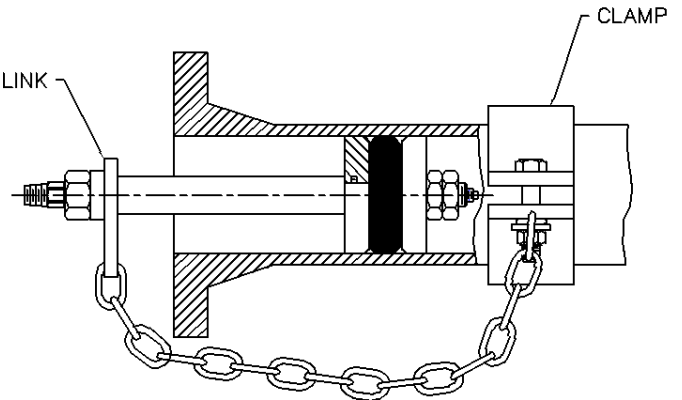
Flange Test Plugs Installed as Isolation Plug, After Flange Has Been Removed.
